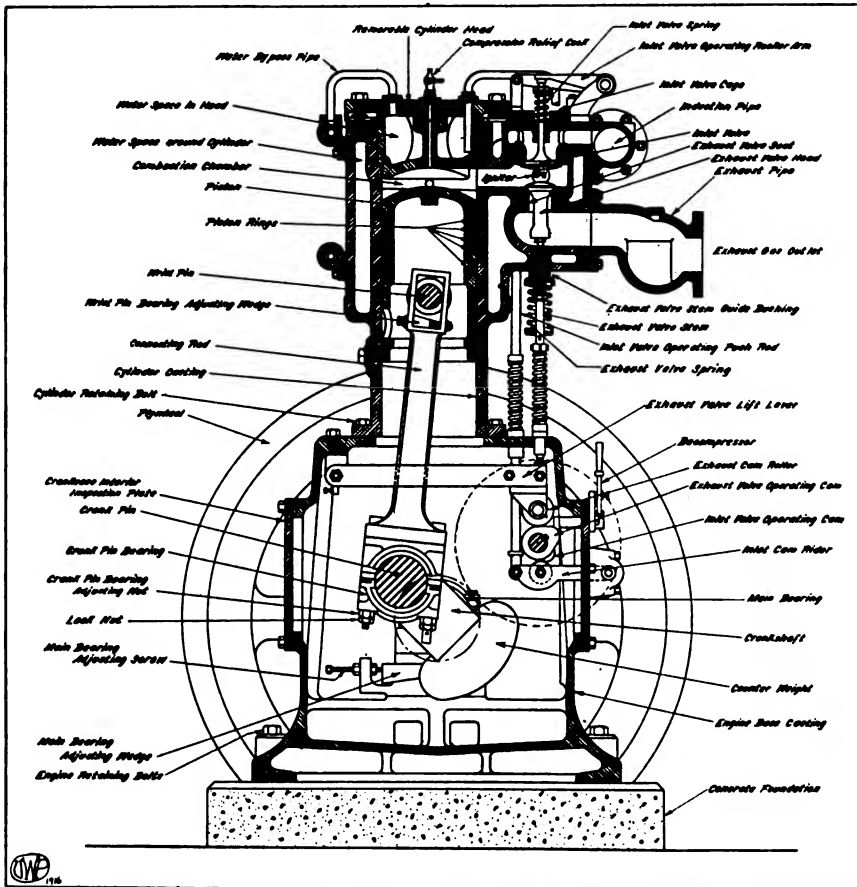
SECTIONAL VIEW TYPICAL STATIONARY GAS ENGINE SHOWING IMPORTANT PARTS
